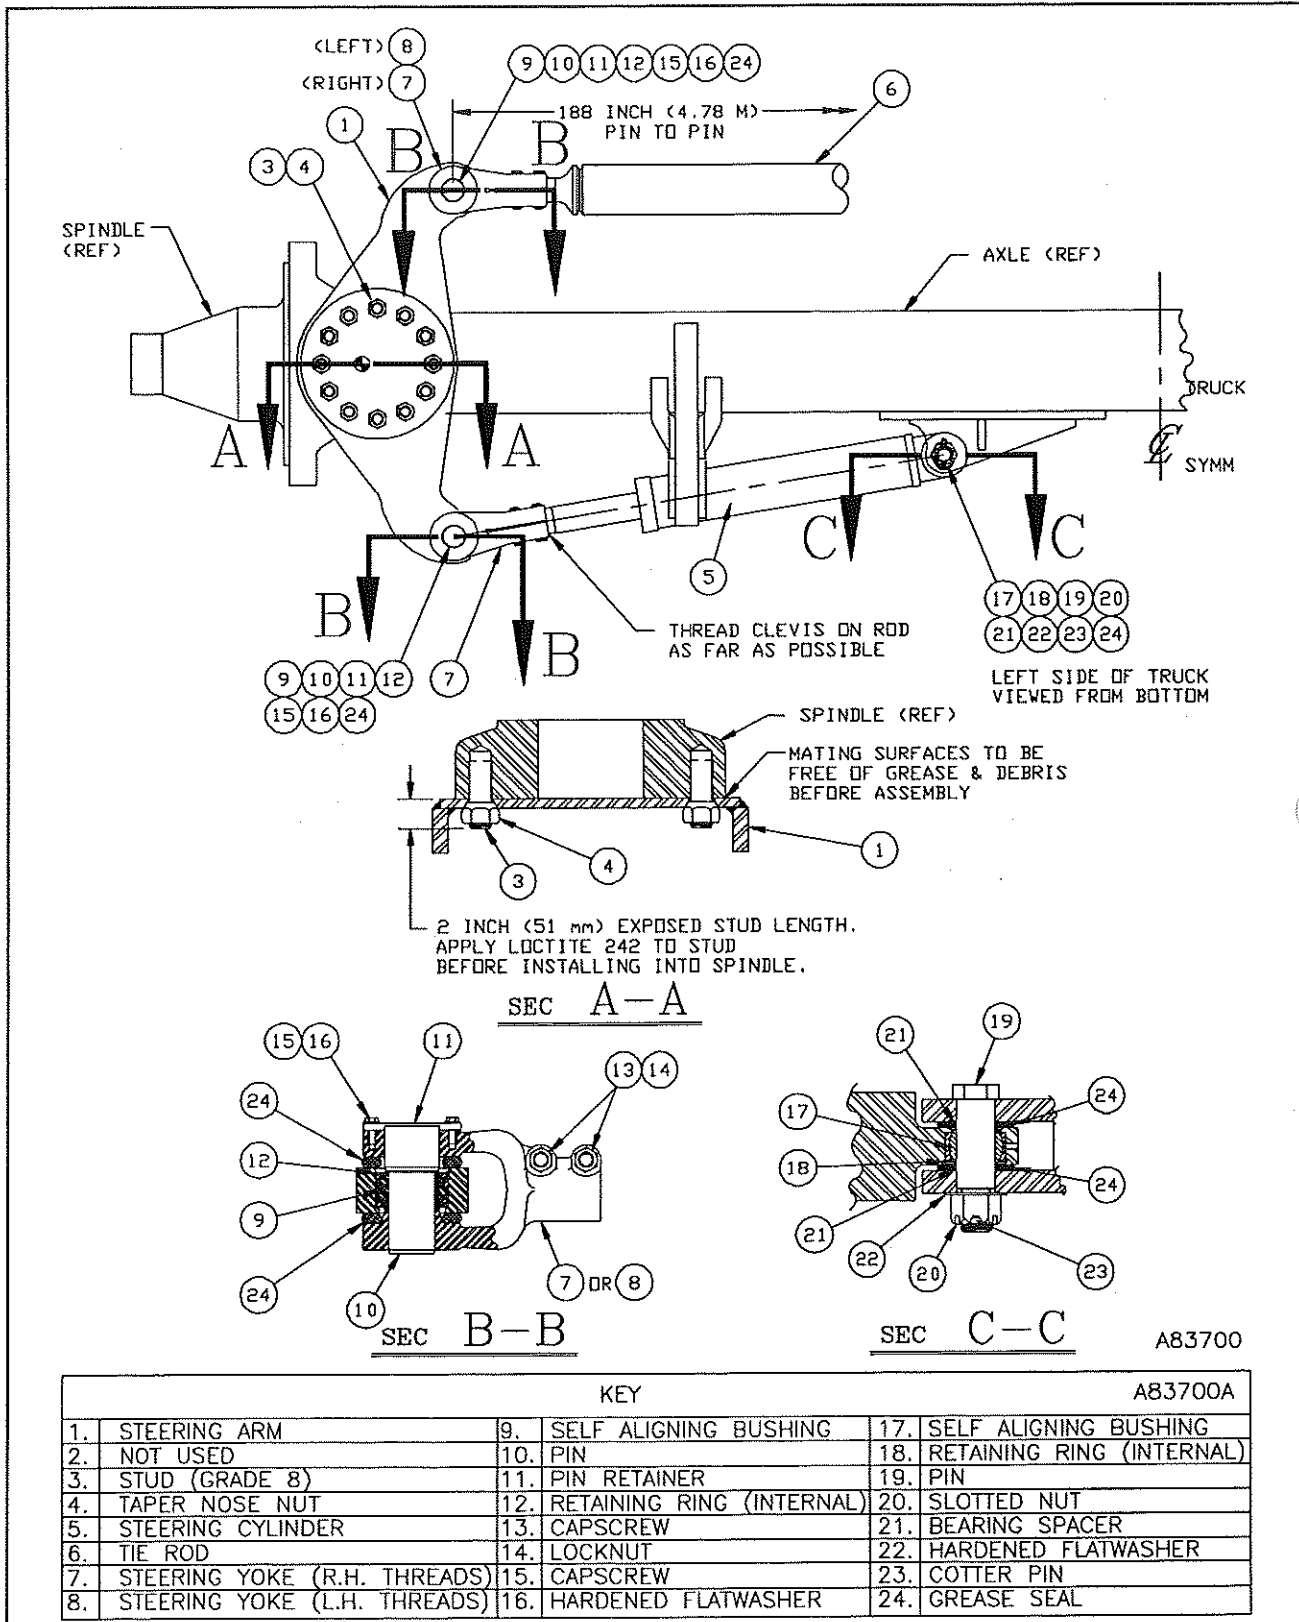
STEERING COMPONENT INSTALLATION ASSEMBLY - STRAIGHT PIN/NUT CONFIGURATION (A83700)
